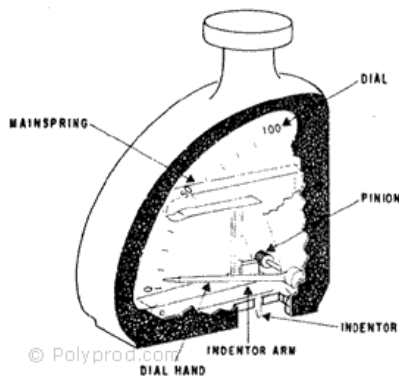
SCHEMATIC DRAWING POCKET-SIZE DUROMETER
